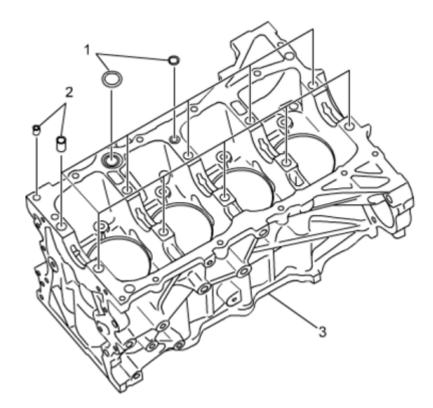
Identifying Dowel Pins And Cylinder Block Courtesy of SUZUKI OF AMERICA CORP.
